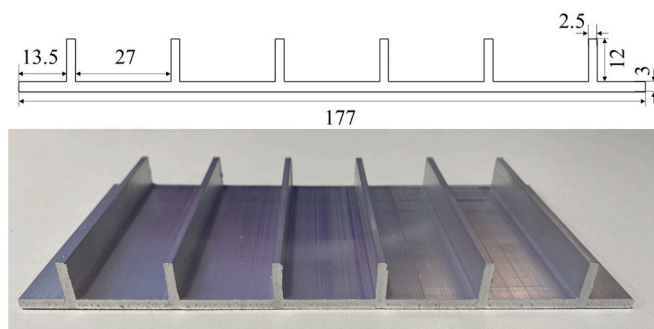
Dimensions of profile designed and the actual extruded AA6061 stiffened panel (unit: mm).
